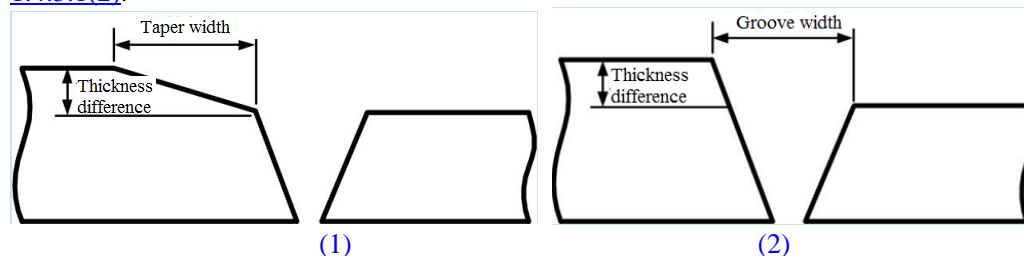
Butt welding of steel plates of different thickness
